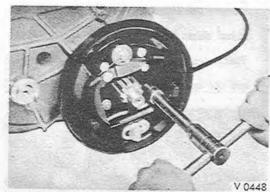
Removing the center brake back plate from the speedometer housing.
